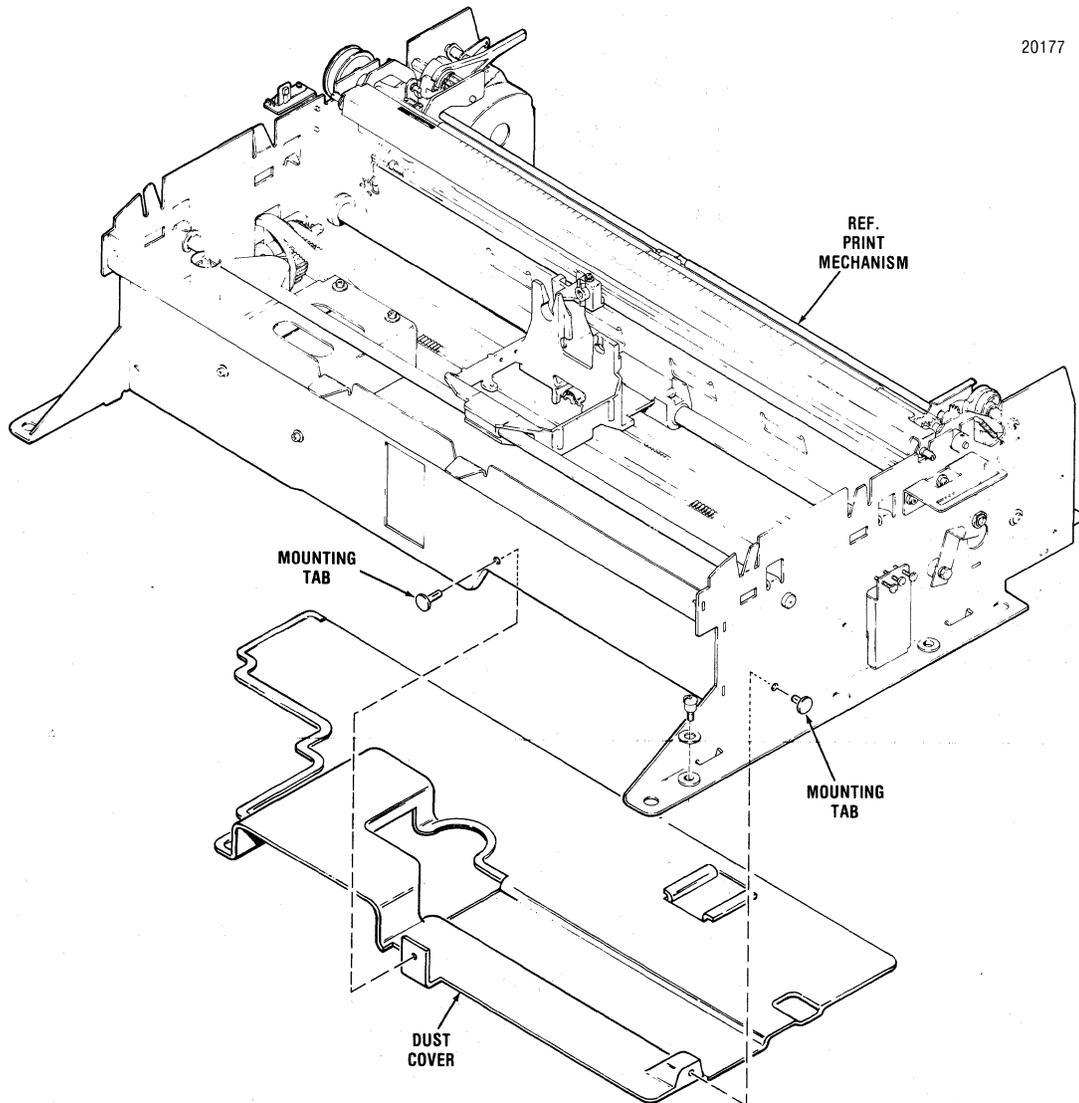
REMOVAL/REPLACEMENT DUST COVER
